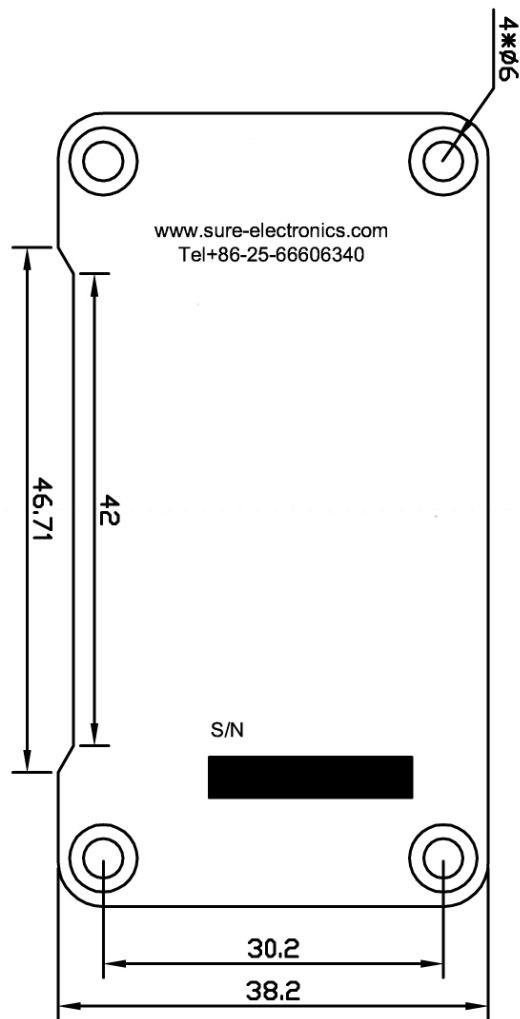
MECHANICAL DRAWING OF THE LEFT PANEL
